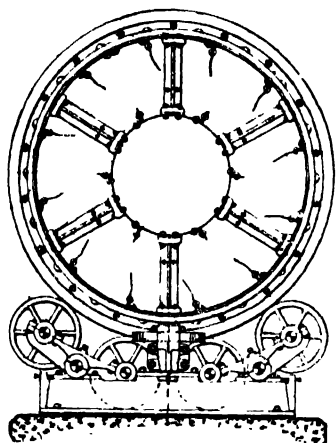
The Ruggles-Coles Dryer : Cross-section.
